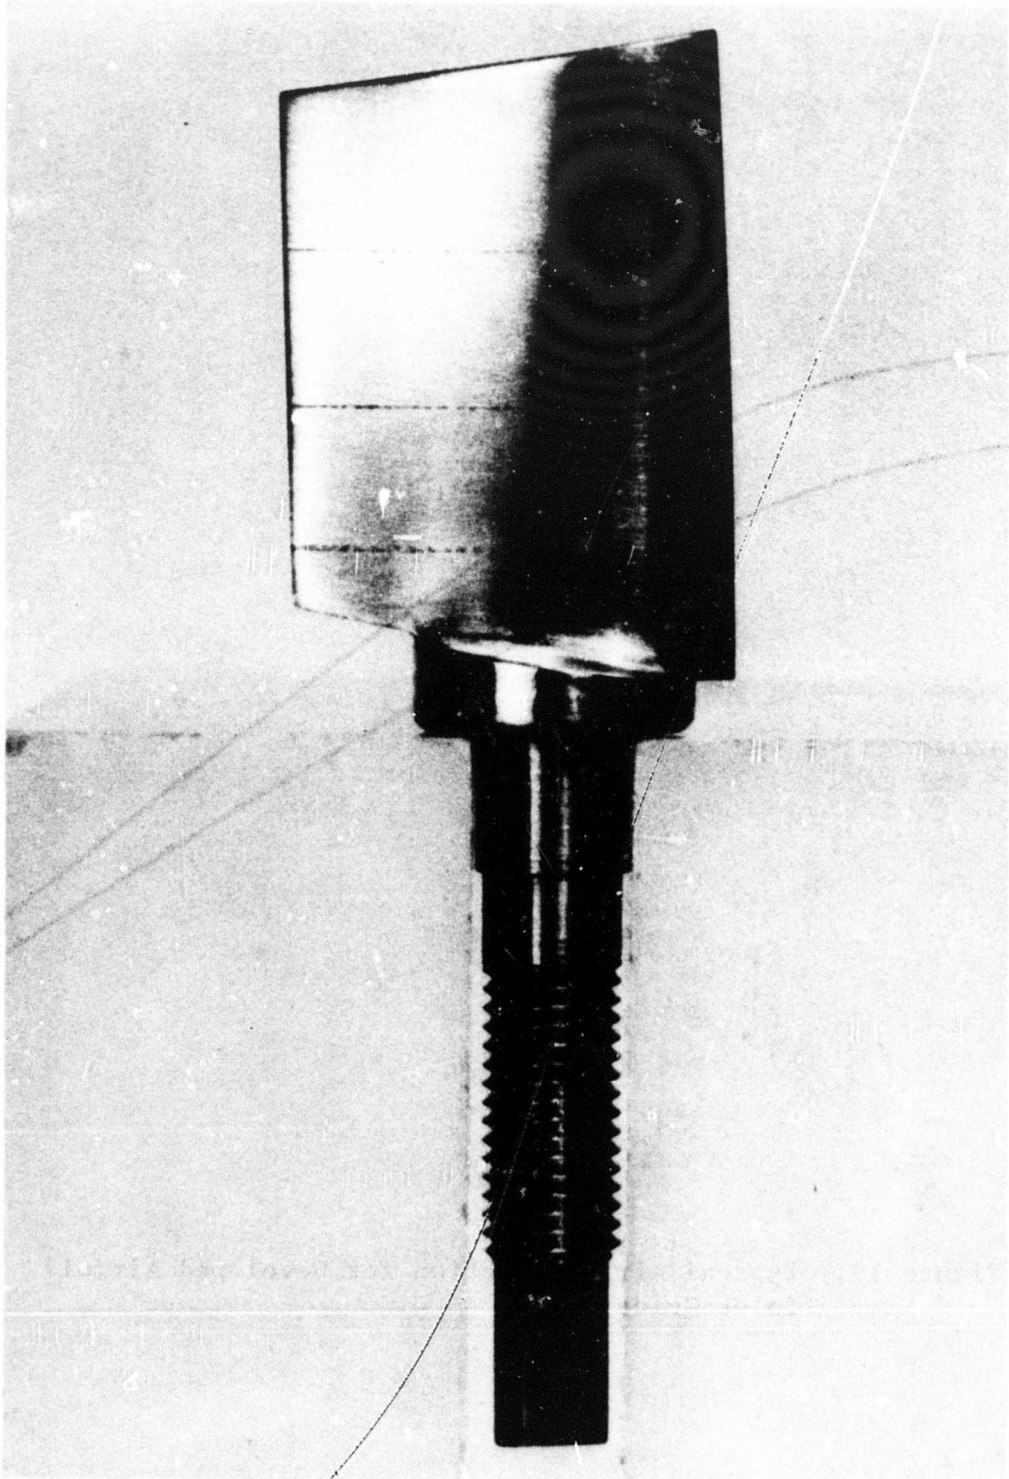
Developed Airfoil Inlet Guide Vane - Side View
